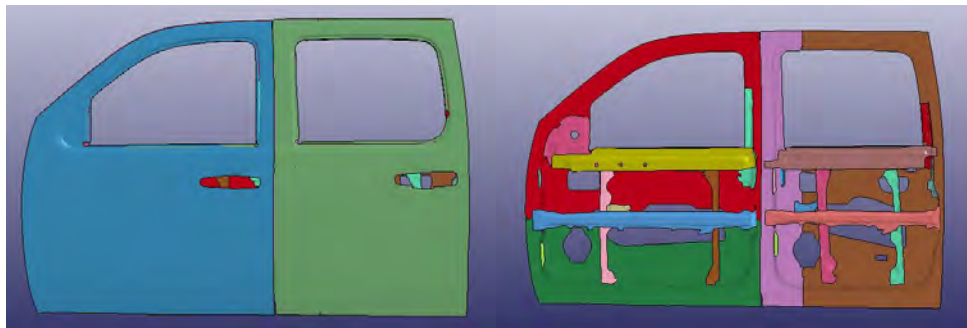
Driver side doors showing placement of additional interior components relative to outer and inner panels
